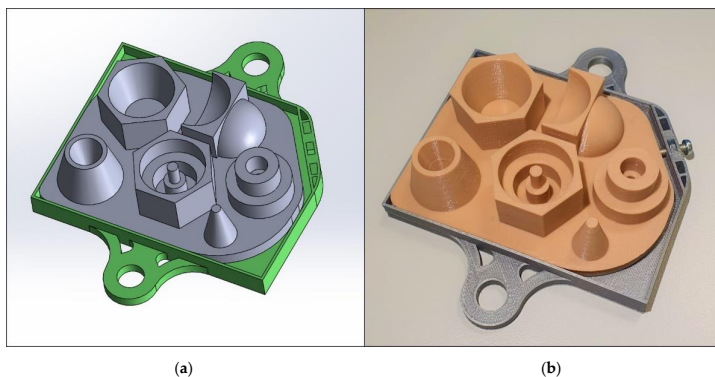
Fixture design for test artifact. (a) Assembled CAD-drawing. (b) The fixture with a prototype of the test artifact in place.
